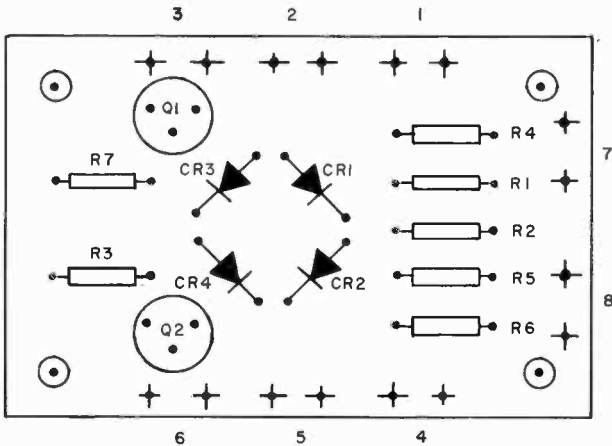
Component placement diagram for the enlarger exposure meter.
